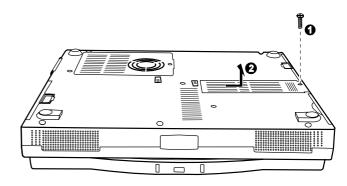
Removing the Fax/Modem/Voice Card Compartment Cover
